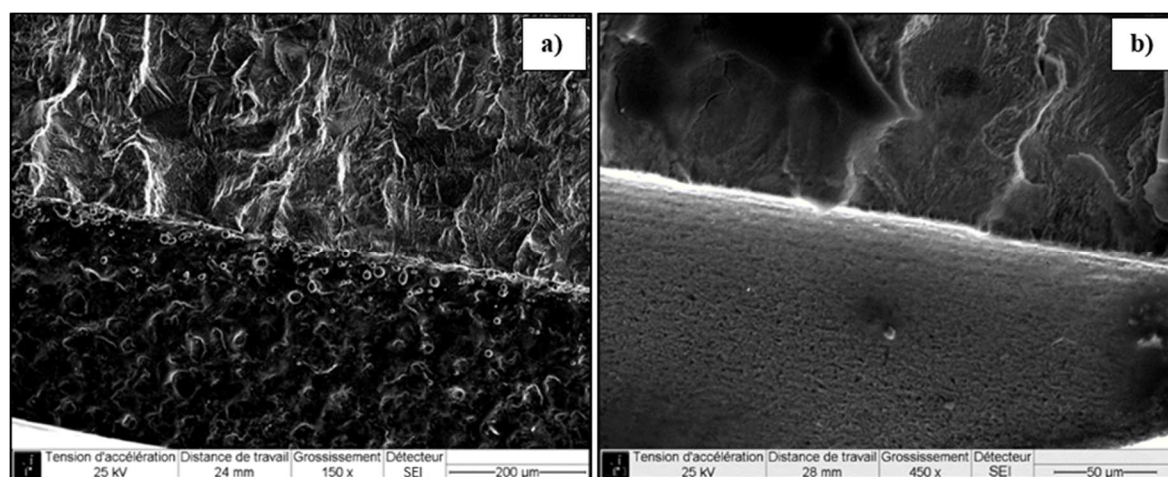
Surface imperfection roughness - a) EDM ; b) Abrasive machine
